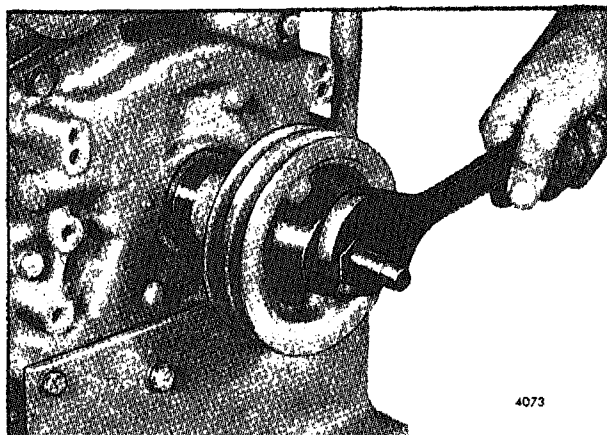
Installing Crankshaft Pulley Using Installer J 7773
